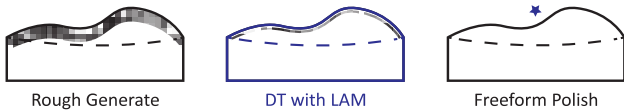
Process chain including laser assisted machining for the manufacture of freeform optics.
